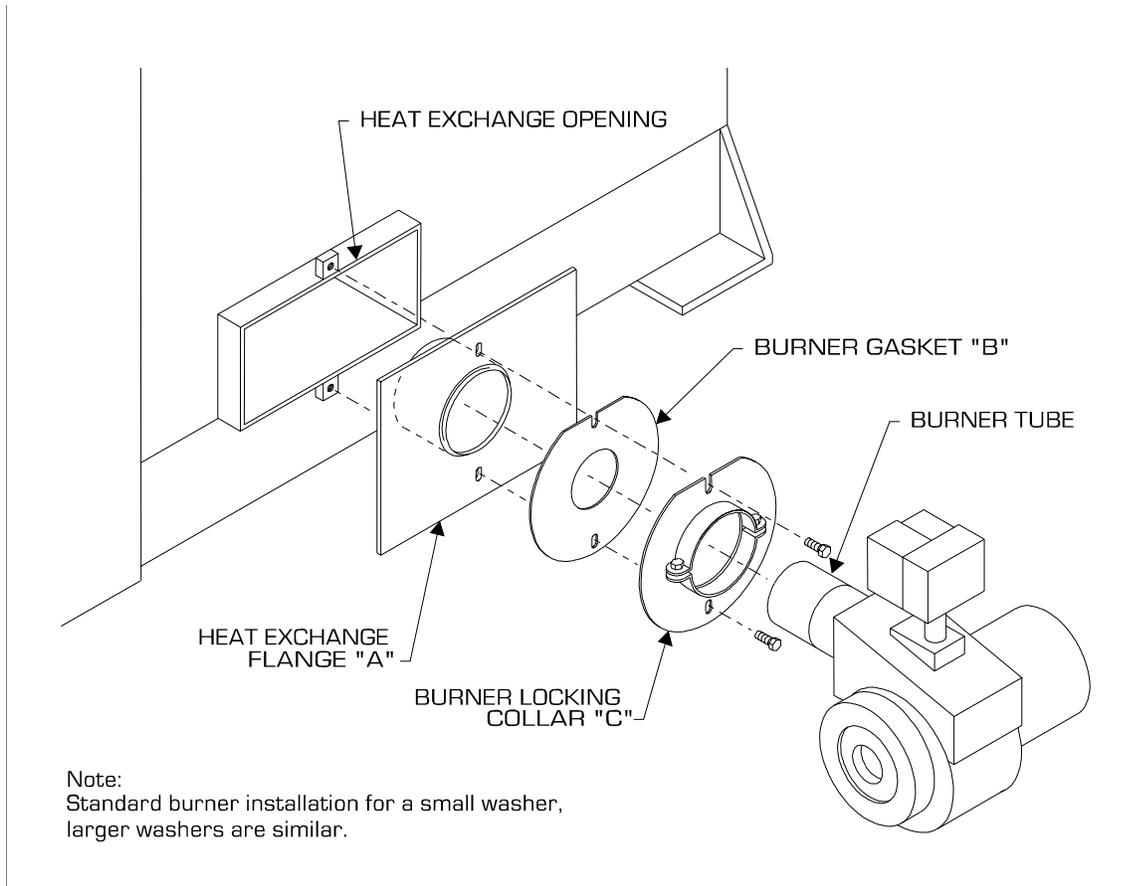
3: Mounting the Combustion Burner (Up to 180,000 BTU)
